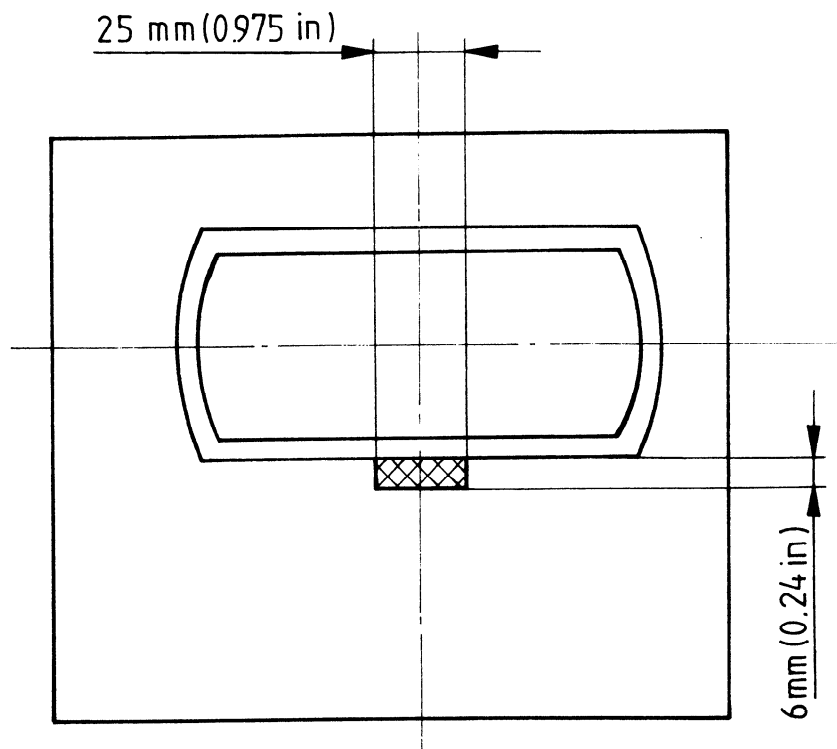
Bottom view of bottom corner fitting showing contact area (shaded) for misgather (push-up) load
